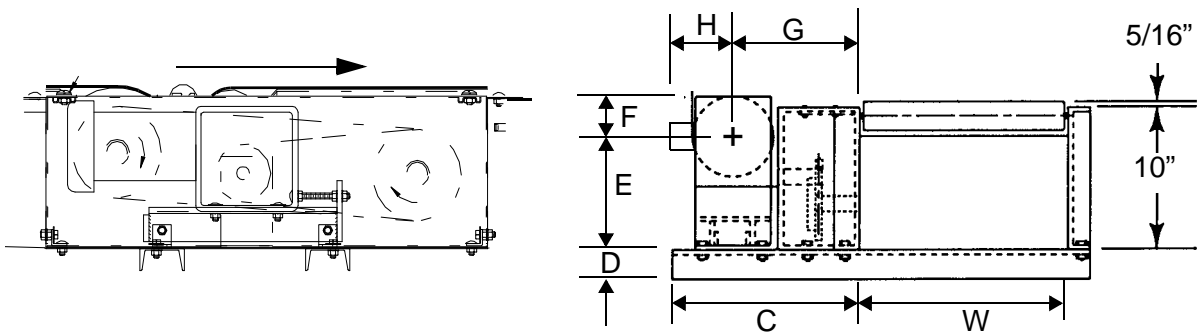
Power Unit - Side Mounted (SM) RH Assembly Shown
